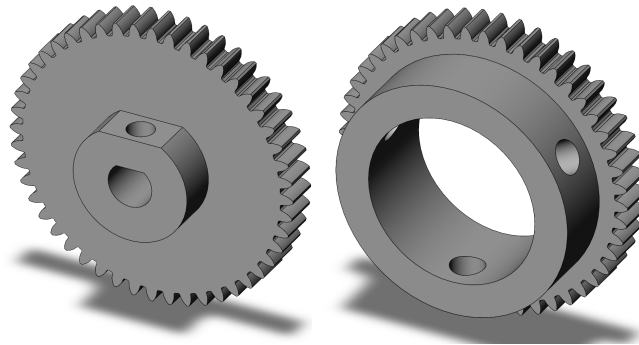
One of the knob gears (left) and one of the stepper gears (right).
